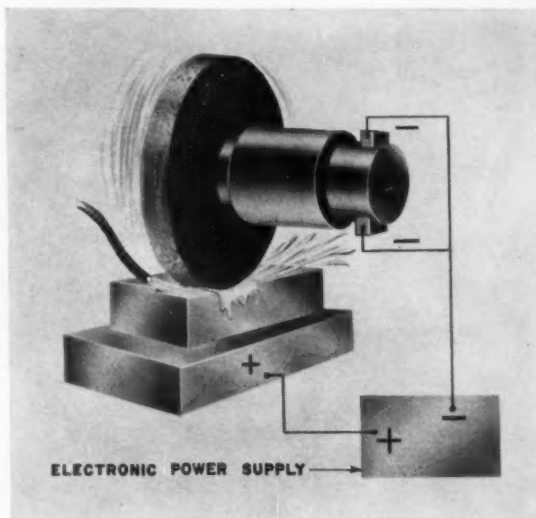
Basic circuit for the electrolytic grinding process. Wheel-spindle is insulated from machine. Electrolyte, which replaces the coolant, dissolves the metal as it is removed.
